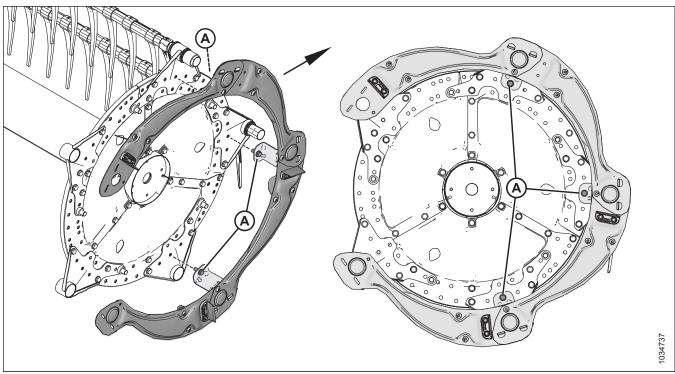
Five-Bat Reel – Partially Assembled Reel Endshields on Reel
